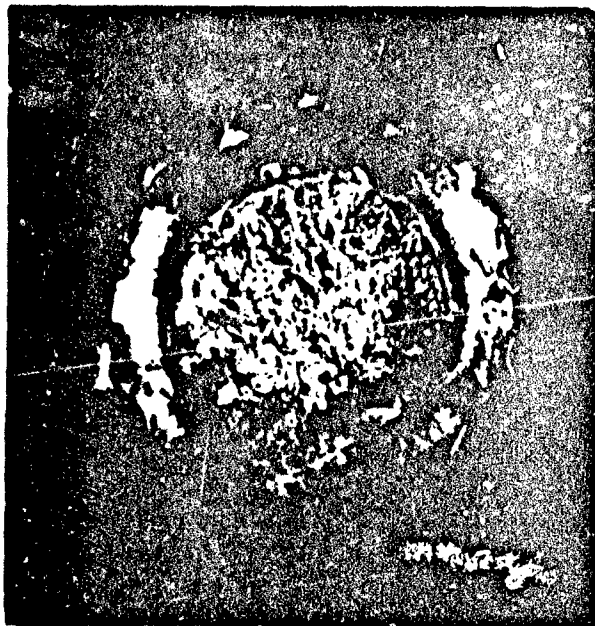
Failure of a ballistically impacted stud weld through the weld toe on the stud side of the joint.
